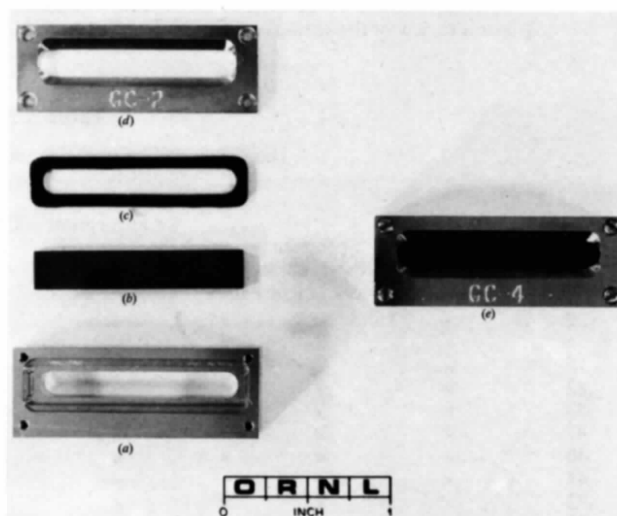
The specimen holder: (a) lower frame, (b) glassy carbon sample, (c) rubber gasket, (d) upper frame, and (e) assembled holder.
